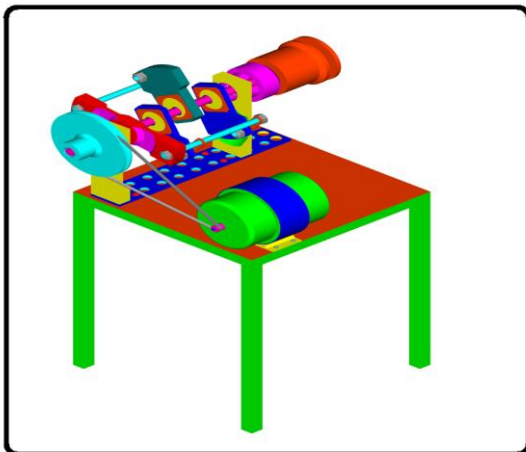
Experimental Setup of mechanical torque converter by using IVT
